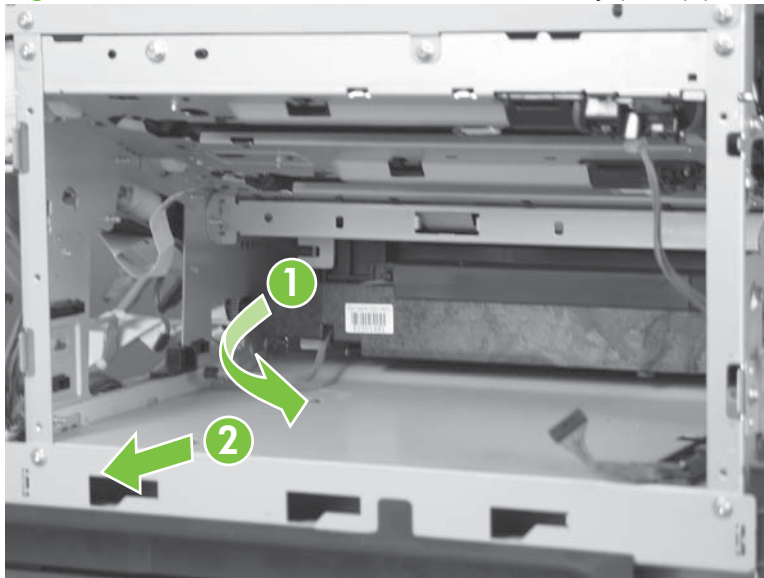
Remove the laser/scanner assembly (C/Bk) (6 of 7)
